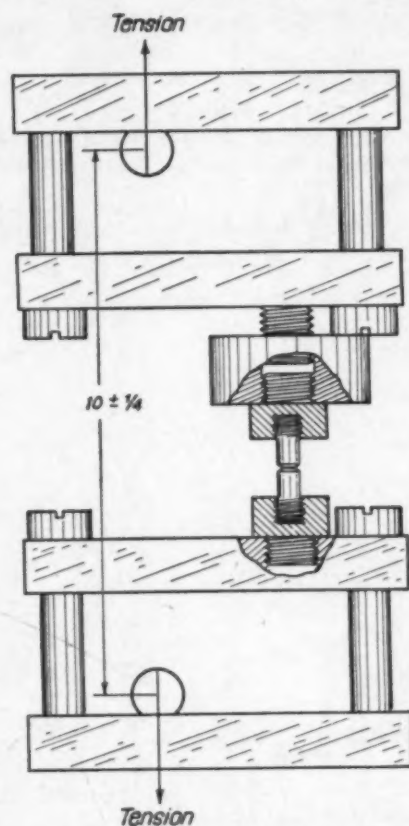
Schematic Diagram of a Small Specimen in Position for Testing in the Eccentric Fixtures.
